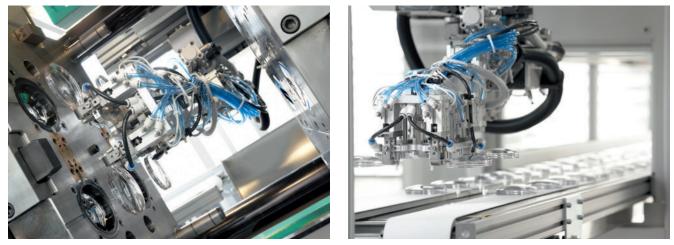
The parts are carefully removed by grippers (left) and deposited directly on the conveyor belt (right)
